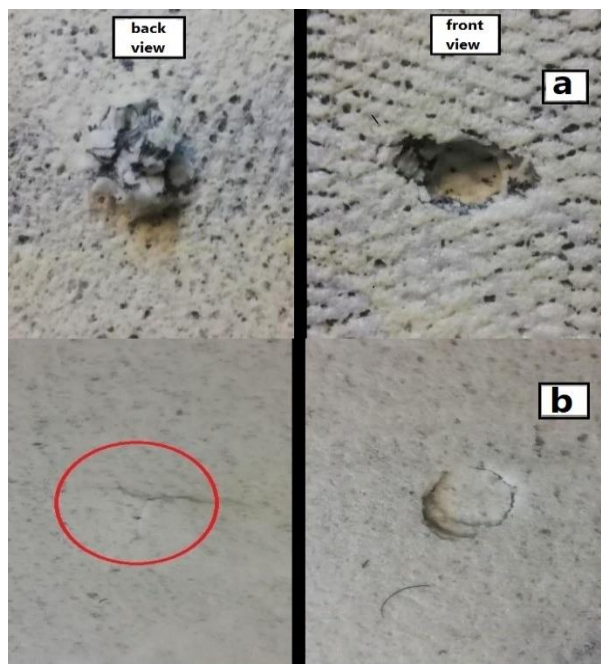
Front and back failure view of samples a)SLN b)BHN
